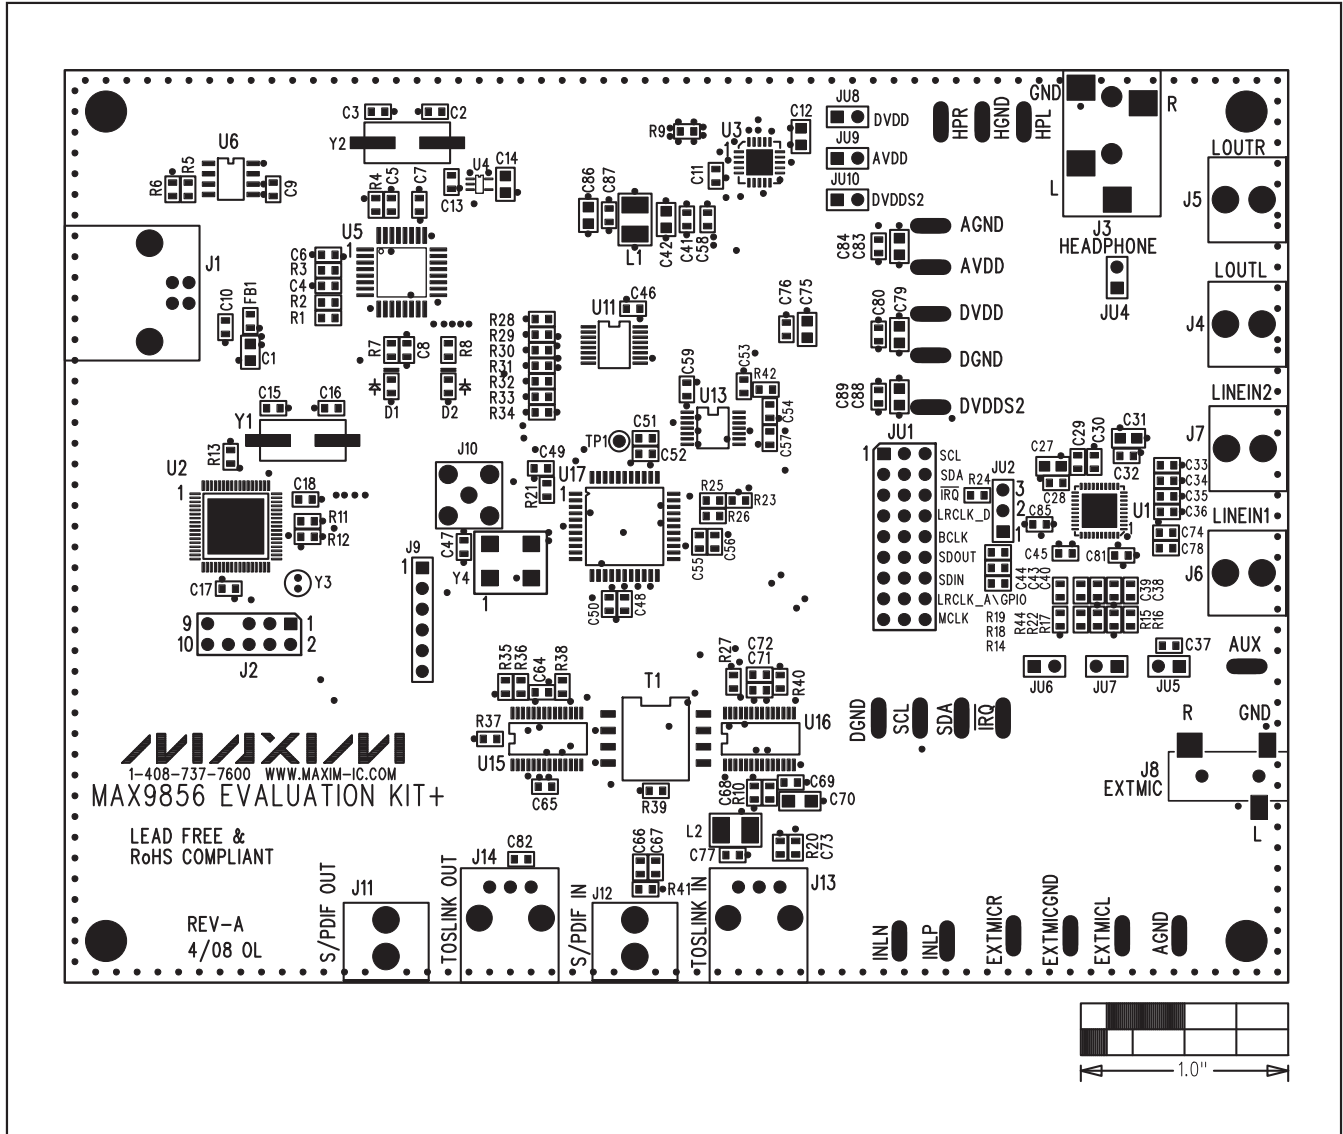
MAX9856 EV Kit Component Placement Guide—Component Side
